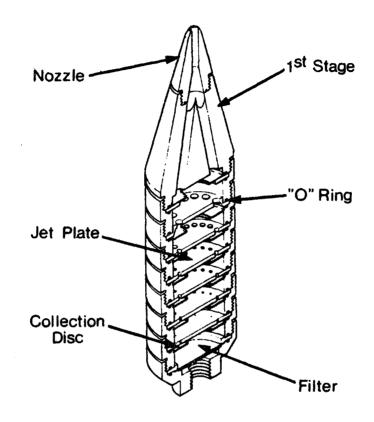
Assembly drawing of Model 1502 Inertial Cascade Impactor.
